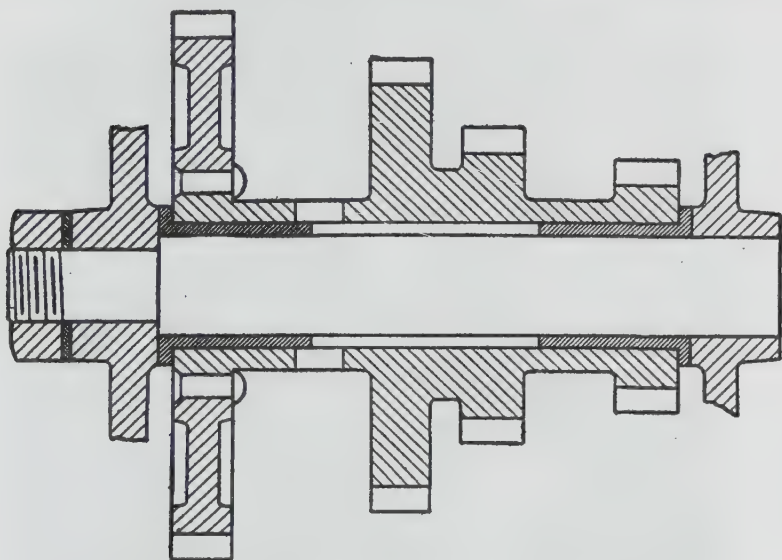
SECONDARY GEAR ASSEMBLY ON STATIONARY SHAFT.
